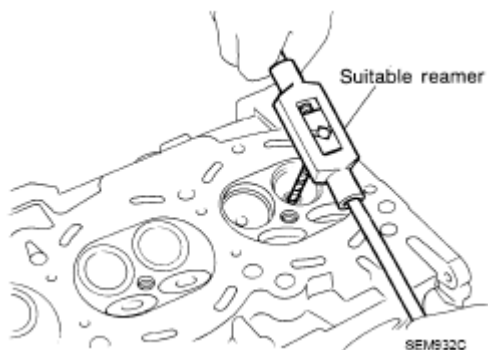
Reaming Cylinder Head Valve Guide Hole
